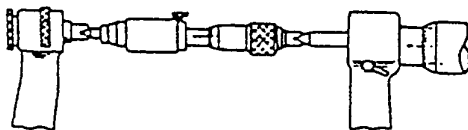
Zero point adjustment of an inside micrometer for measuring internal threads
